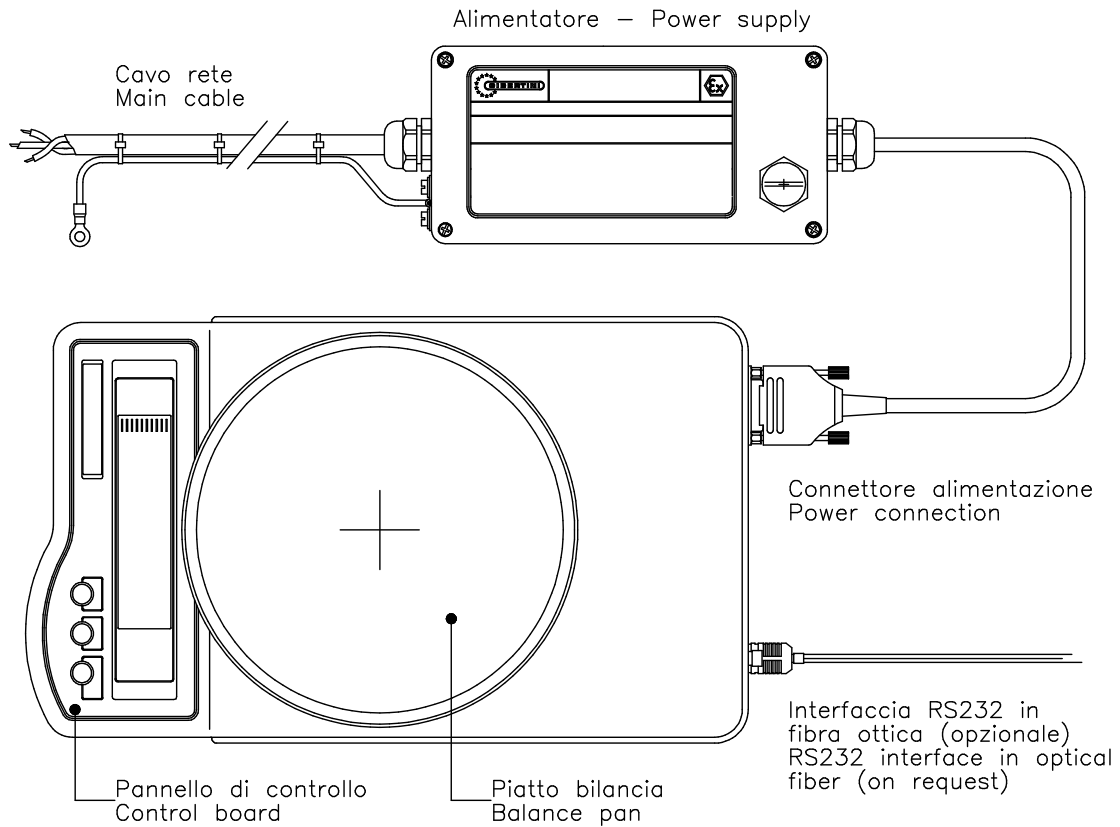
FIG. D - EURO-PAINTEX Ex Balance: assembly view-control panel
